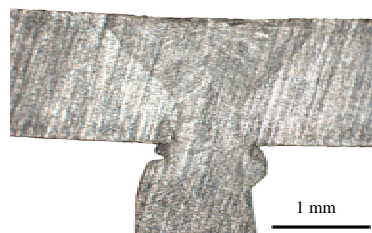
Transverse section view for the keyhole laser welded T-joint.
